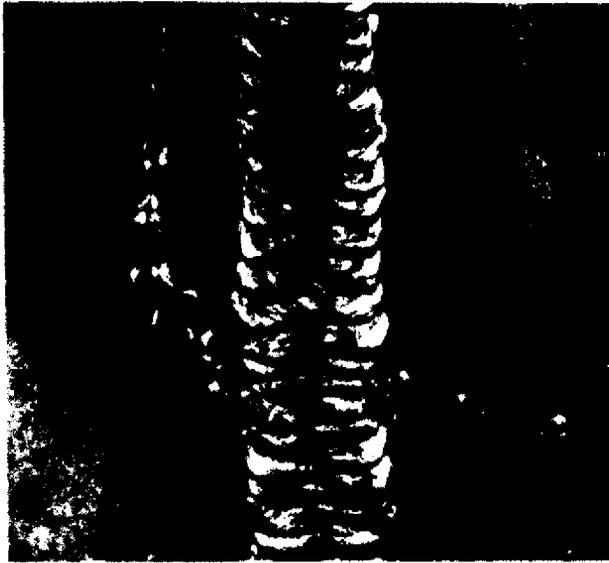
Deposits caused by striking the arc outside of the weld joint.
